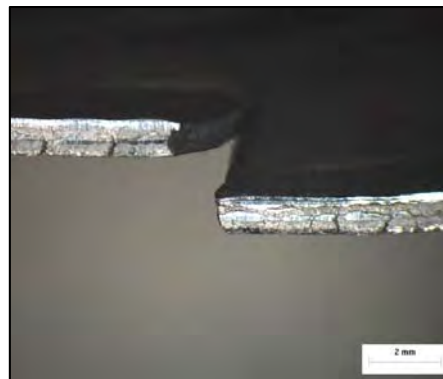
B-15: Close-up of same edge fracture.^{M-4}
